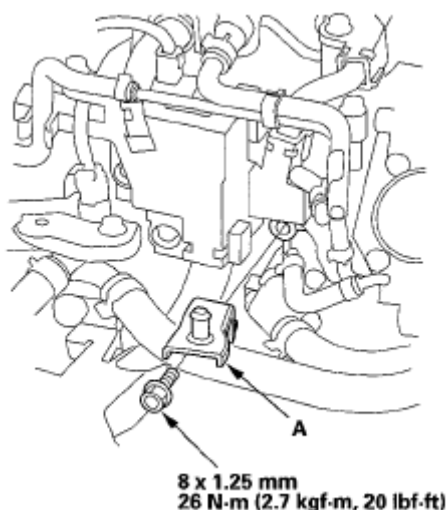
Identifying Air Cleaner Housing Mounting Bracket & Bolt
